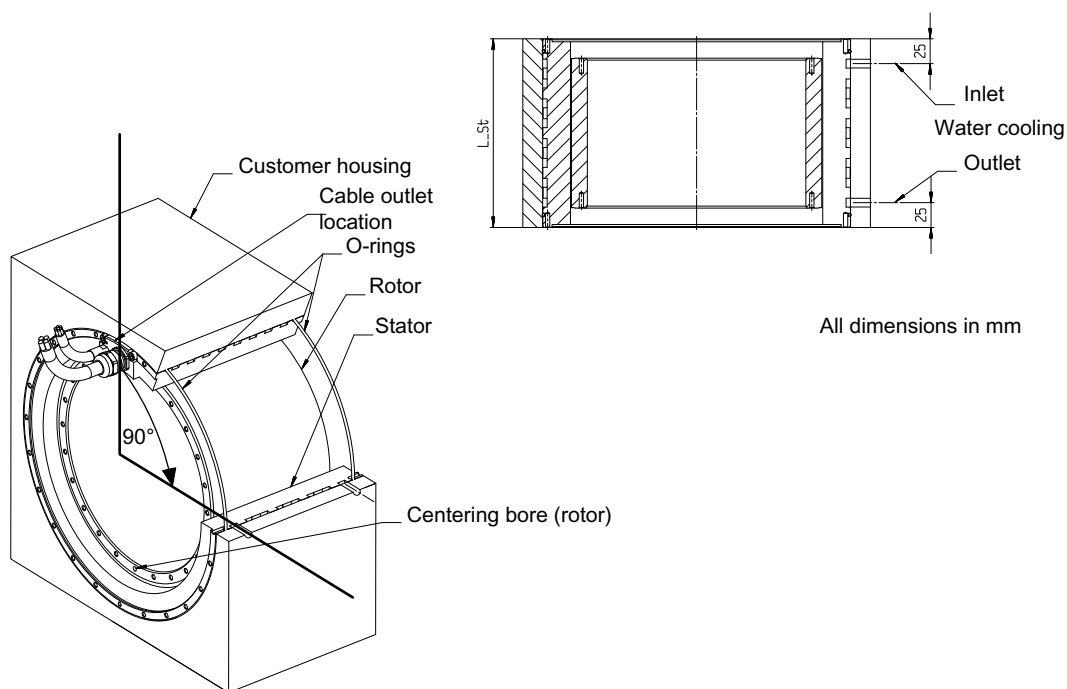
Cooler connection for 1FW609 and 1FW613 (example)
